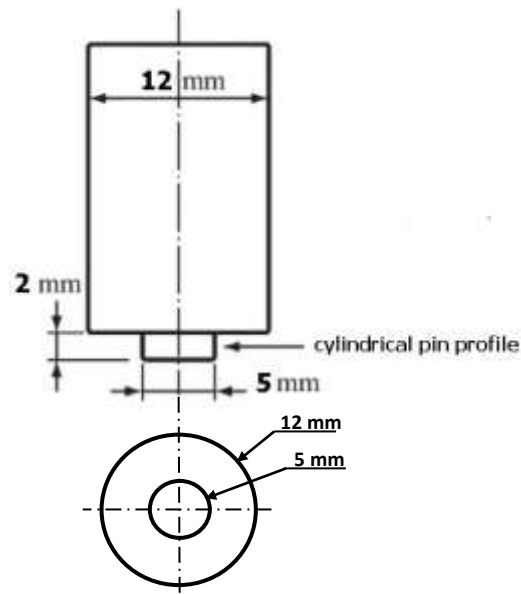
Geometry of FSSW tool with cylindrical pin profile.
